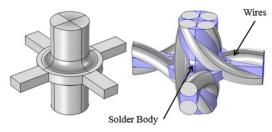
Solder Body (left) and combined with wires in a crossroad (right)
